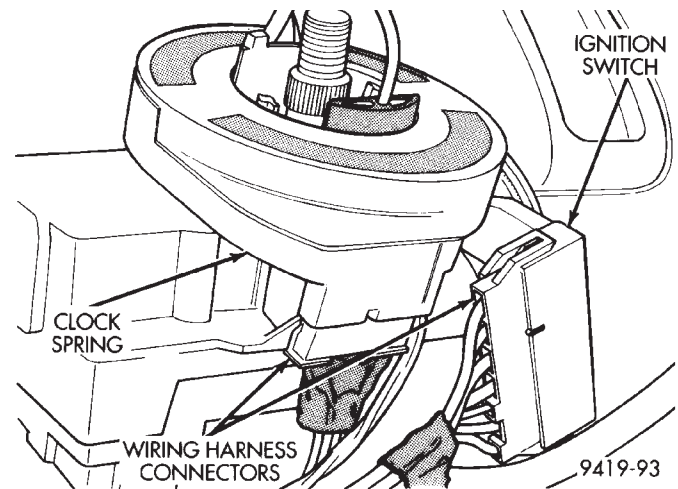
Wiring Harness Connection To Clock Spring And Ignition Switch
